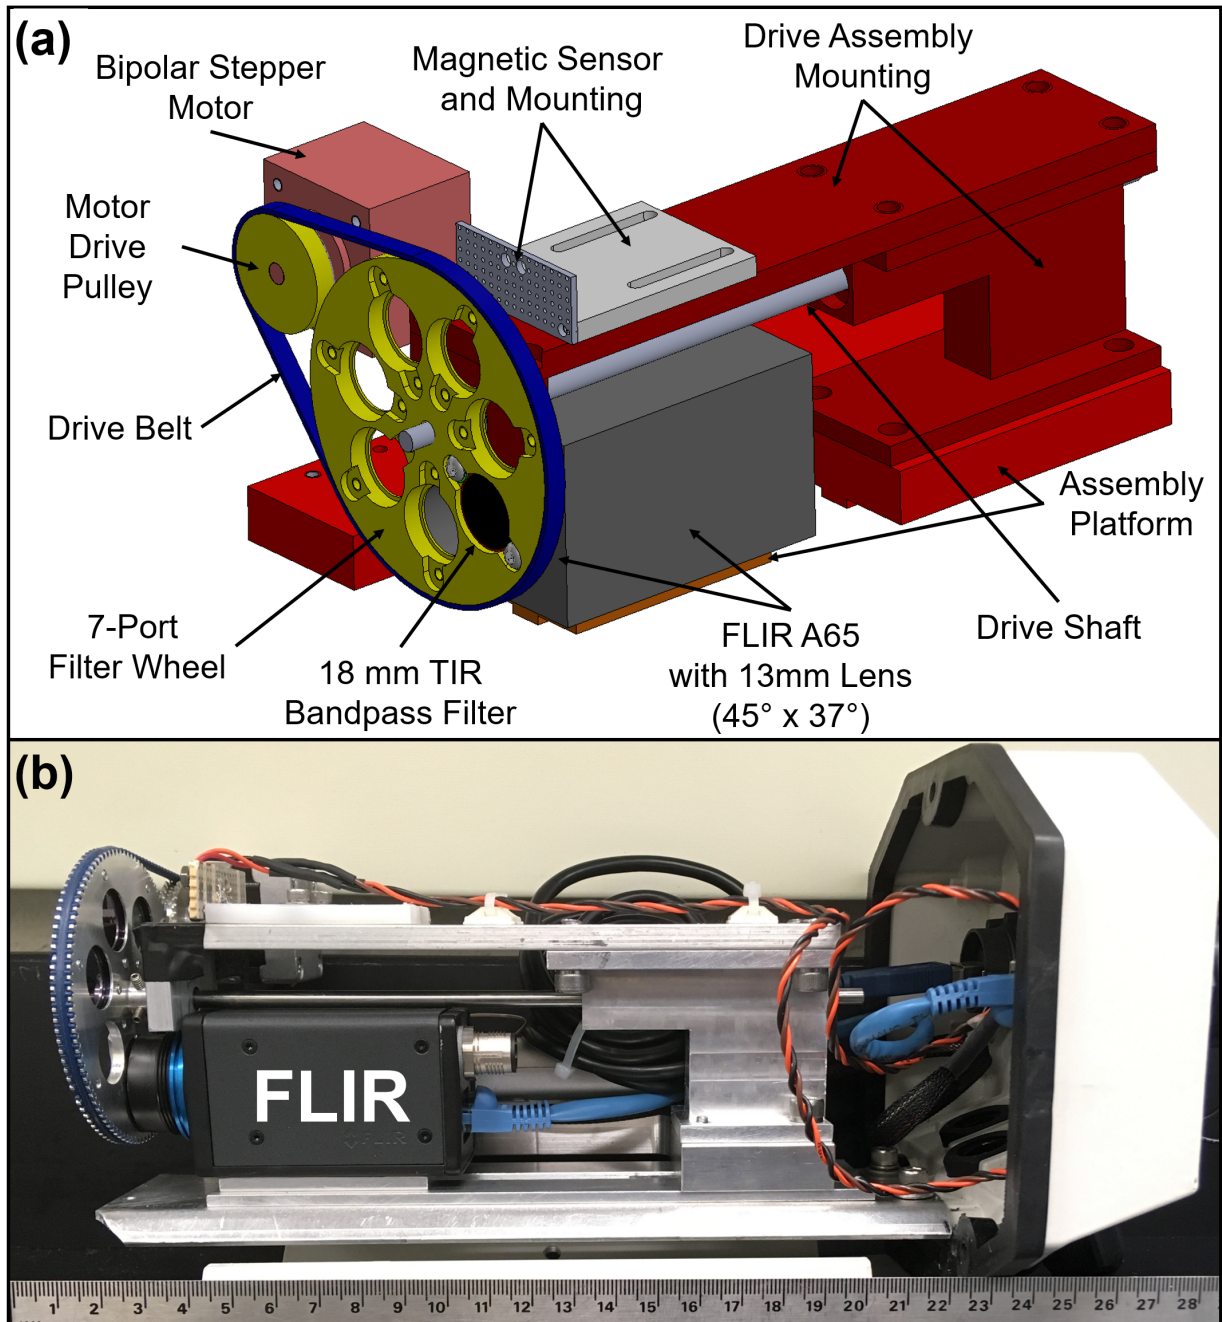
MMT-Cam system. (a) CAD assembly model. (b) Completed assembly inside the weatherproof enclosure, showing the location of FLIR A65 camera core and filter wheel (photograph taken by J.O. Thompson). A thermocouple is also attached to outside of the FLIR A65 body to monitor its temperature, which is used in the calibration procedure.
